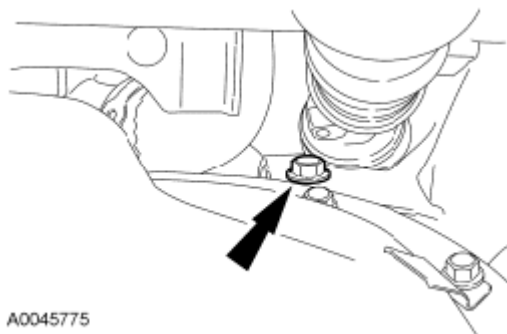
Locating Upper Front Axle Carrier Mounting Bushing Bolt
